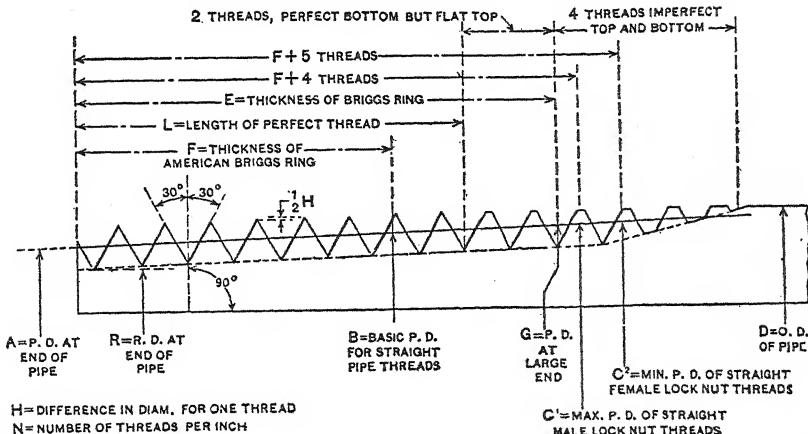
The American (Briggs) Standard Pipe Thread with Lock-Nut Threads and Basic Straight Pipe Sizes.
